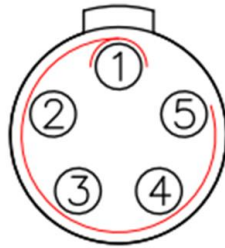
Welding Surface at Port B of the Configuration Cable (HJ394)
